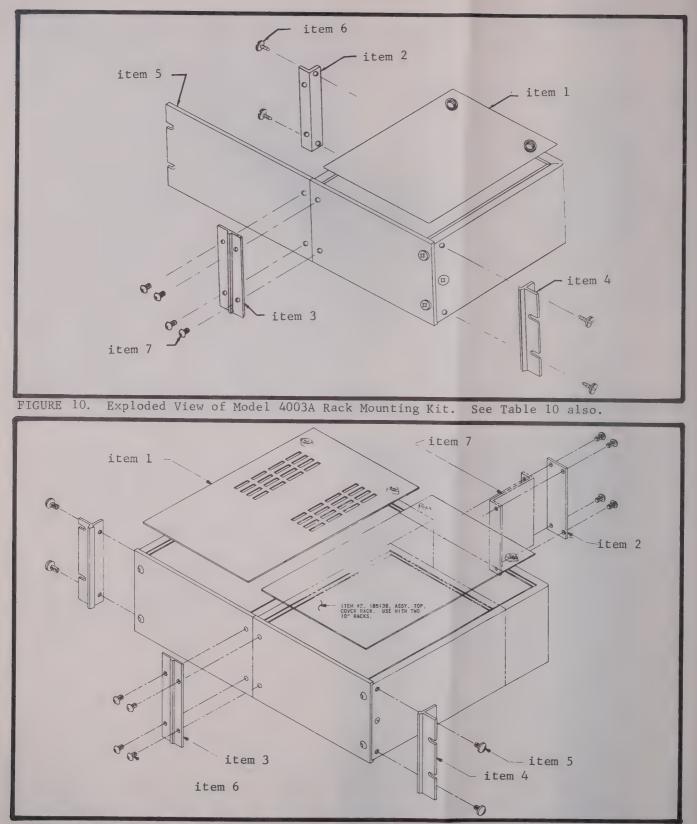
Exploded View of Model 4004A Dual Rack Mounting Kit. See Table 11 also.
